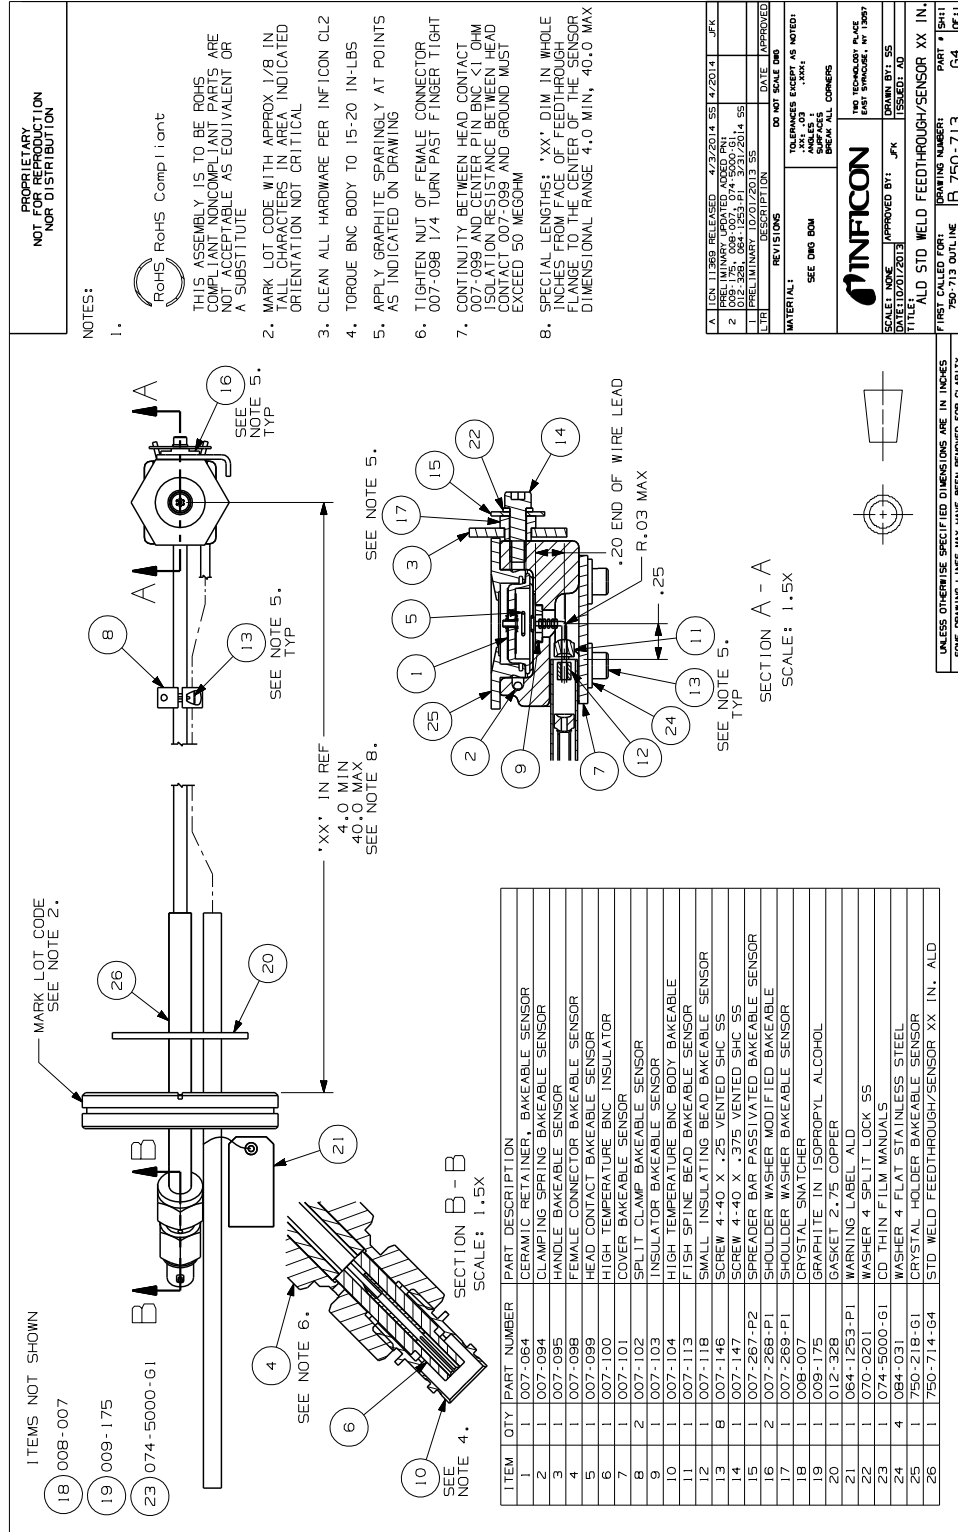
Welded ALD Sensor (PN 750-713-G4) assembly drawing
